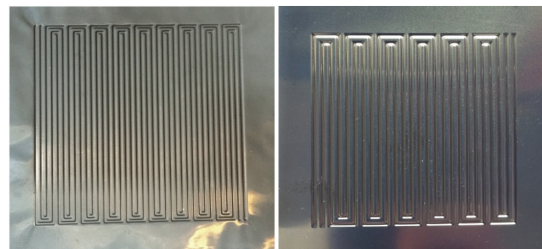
Fabricated bipolar plates by solid material process: (a) Stamping and (b) Rubber pad forming.
